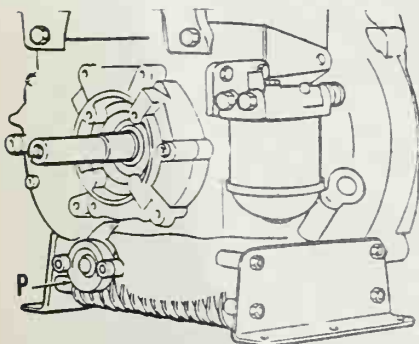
Remove oil pickup (P) for access to internal oil filter.
